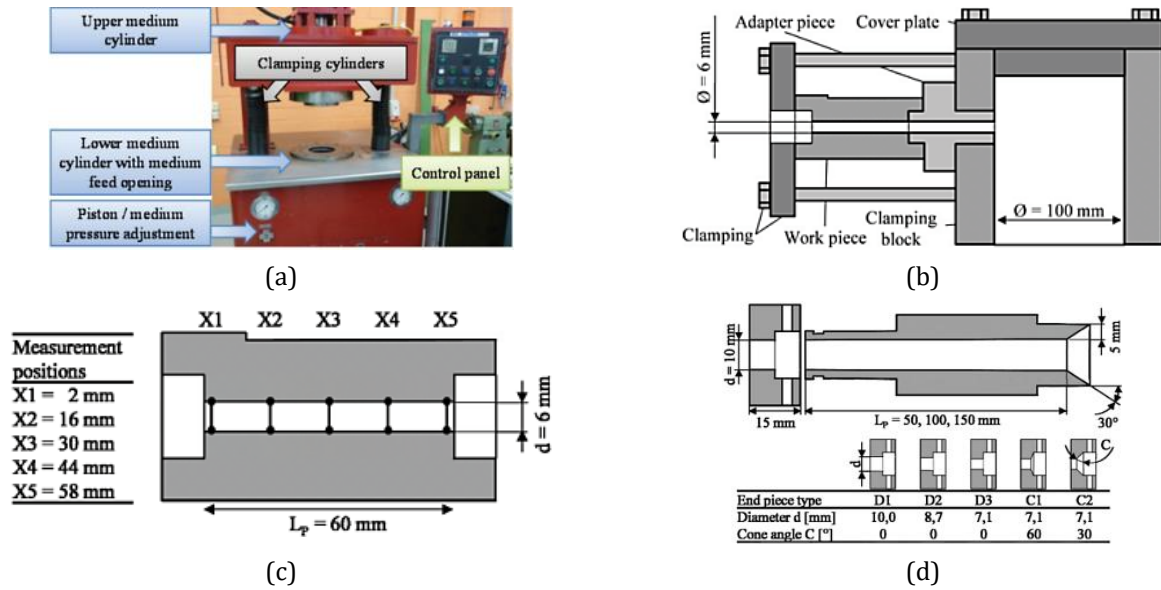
(a) ExtrudeHone AFM (b) Flexible clamping block (c) Workpiece [36].
